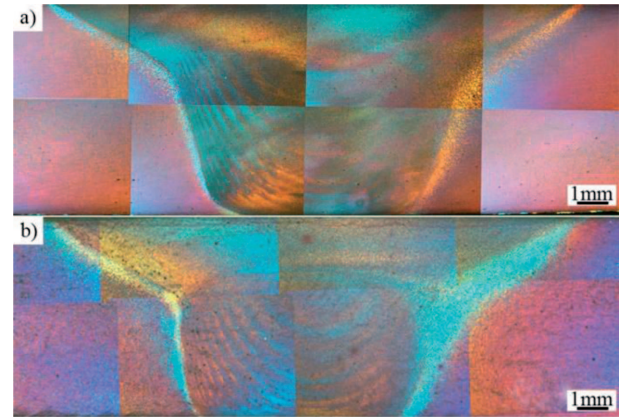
Optical macrograph of the weld regions: a) 7136 alloy, b) 7042 alloy
